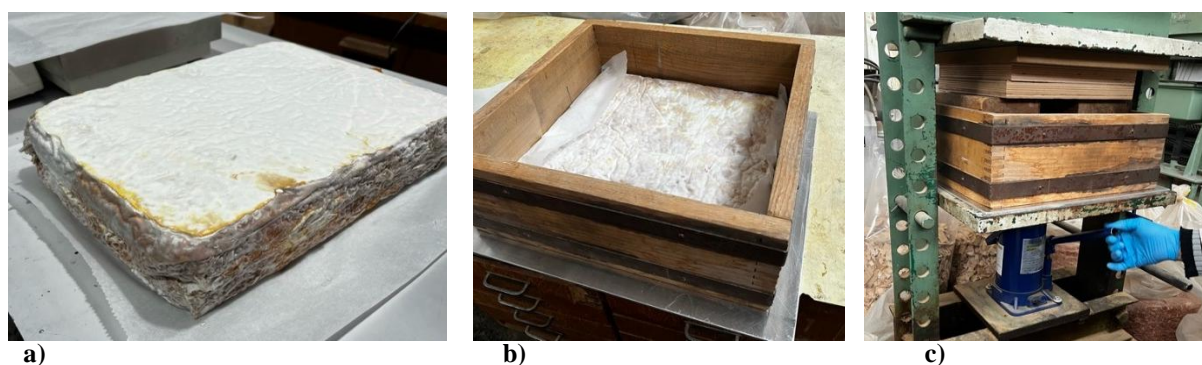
Prepare samples a) fully colonized sample b) in cold pressing mold c) cold pressing
